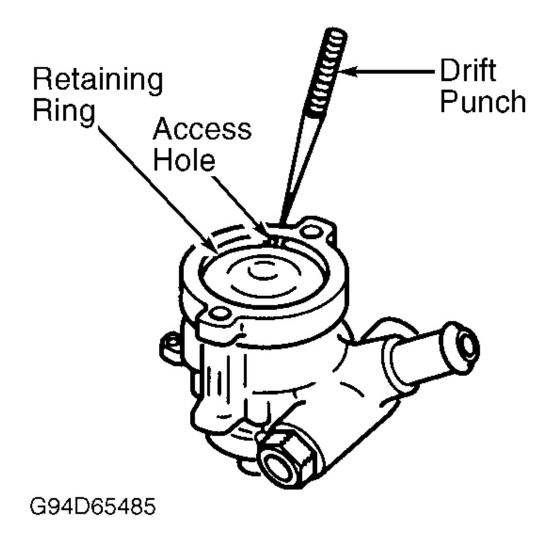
Removing Retaining Ring (Pump Model "CB") Courtesy of GENERAL MOTORS CORP.
